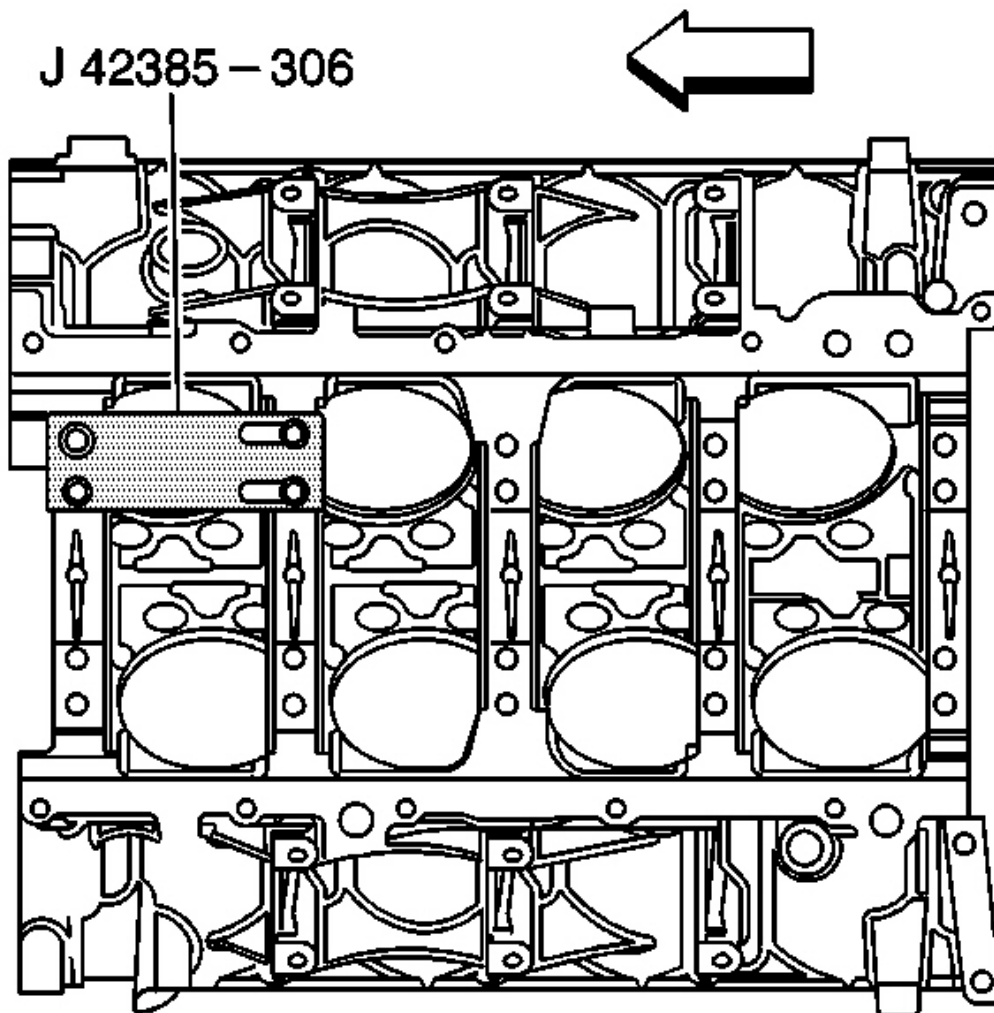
View Of Fixture Plate, Bolt & Bushing
